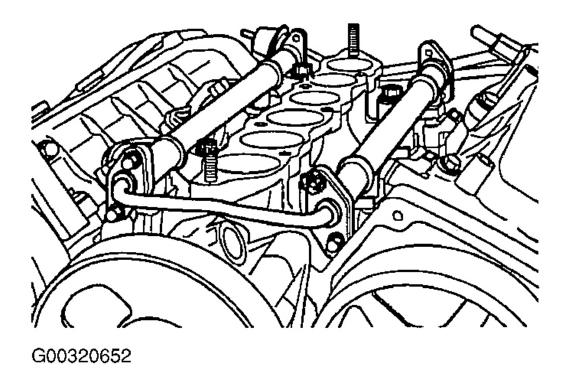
Removing Fuel Delivery Pipe Courtesy of KIA MOTORS AMERICA, INC.
